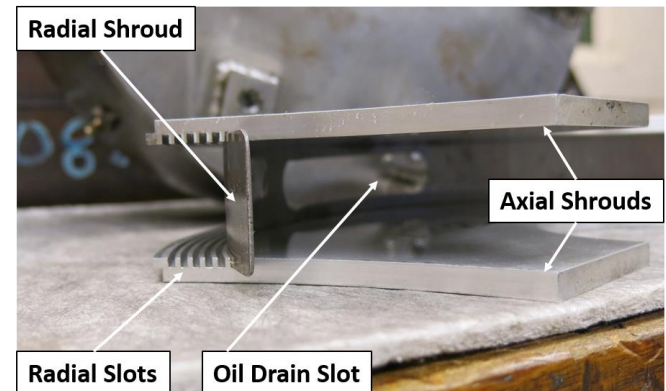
Configuration of radial and axial shrouding. Axial shrouds are 1/4 in. (6.35 mm) thick and radial shrouds are 1/16 in. (1.5875 mm) thick.
